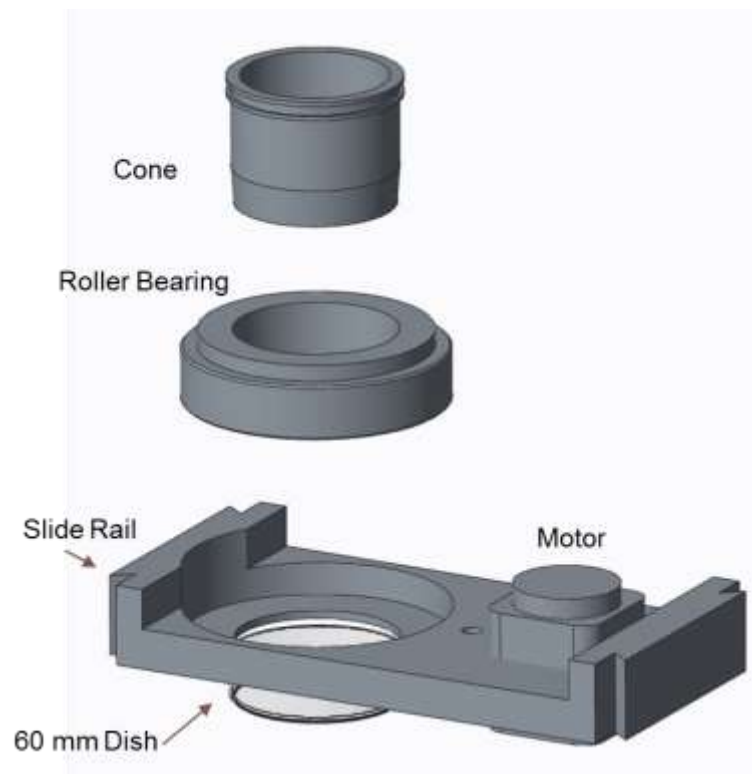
Carriage plate assembly with cone, bearing, and motor exploded view
